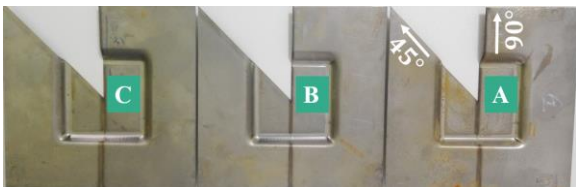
Three samples of TWBs of St12/1-St12/1 formed to a depth of 11 mm; the weld line is along rolling direction
